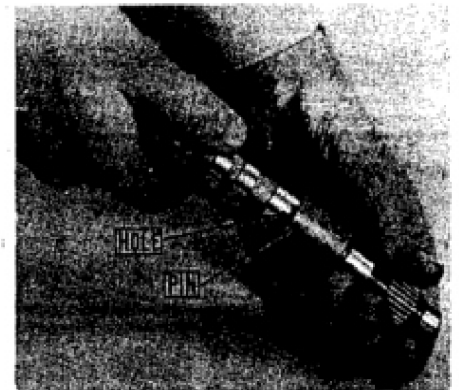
Pin in actuator sleeve must be engaged in hole in end of control valve spool before actuator assembly is installed. If spool cannot be pulled out of sleeve, pin is engaged.
